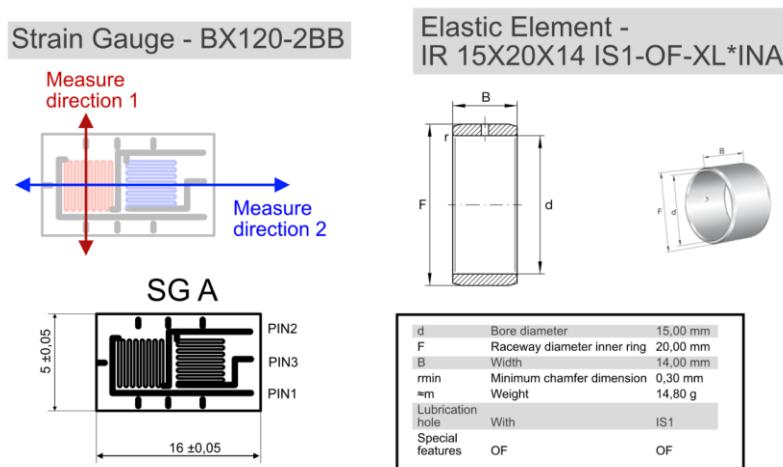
BX120-2BB Strain Gauge components and its dimensions
